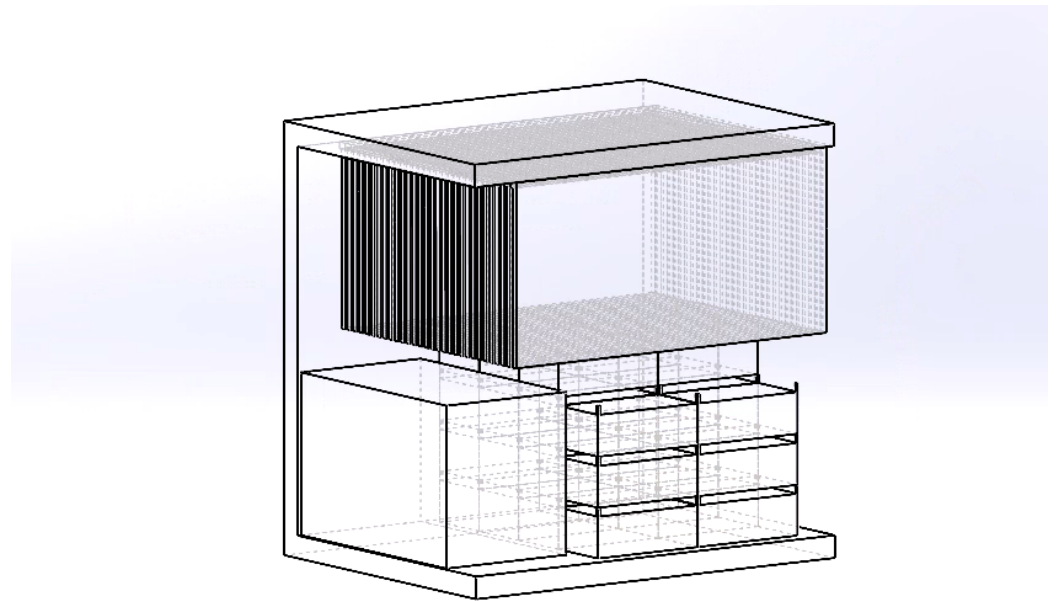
This figure shows a SolidWorks CAD drawing of the TriCon and three major components using component dimensions from Table 2. This CAD drawing shows the space occupied by the total quantities of the three major components of the design, PV, EDG, and BESS, and remaining space for detailed design components.
